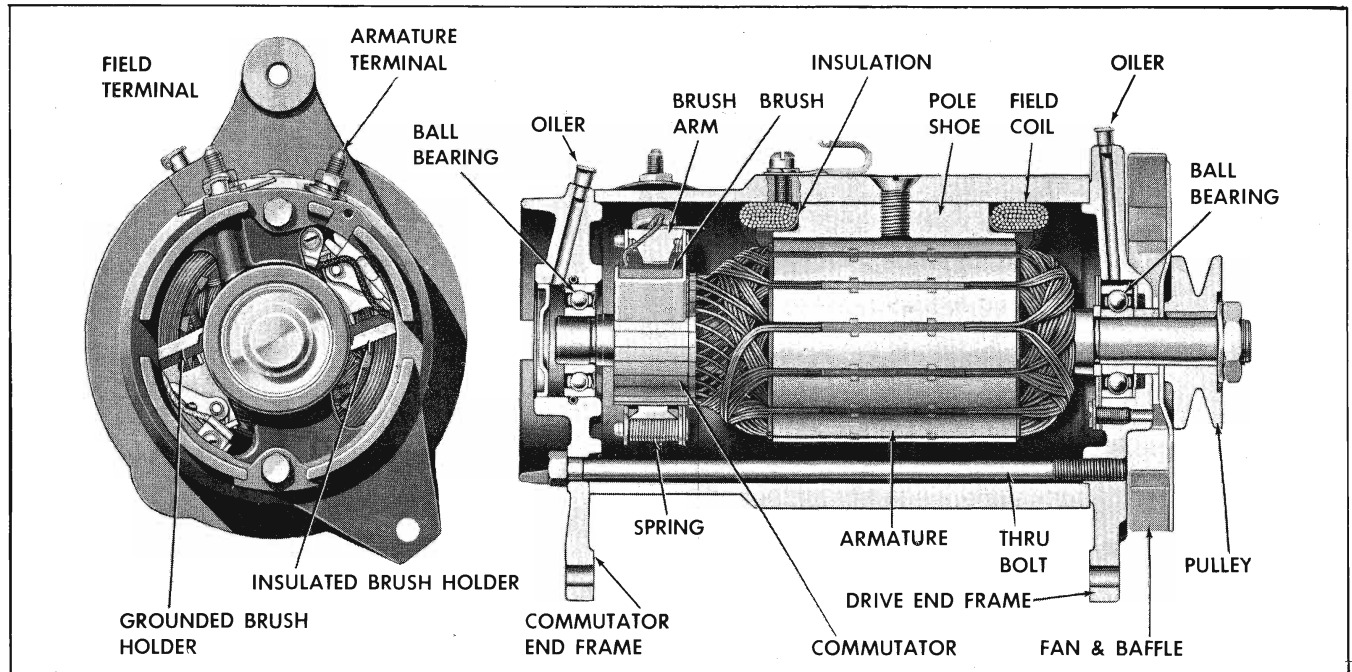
Cross Section of Heavy Duty Generator Assembly
